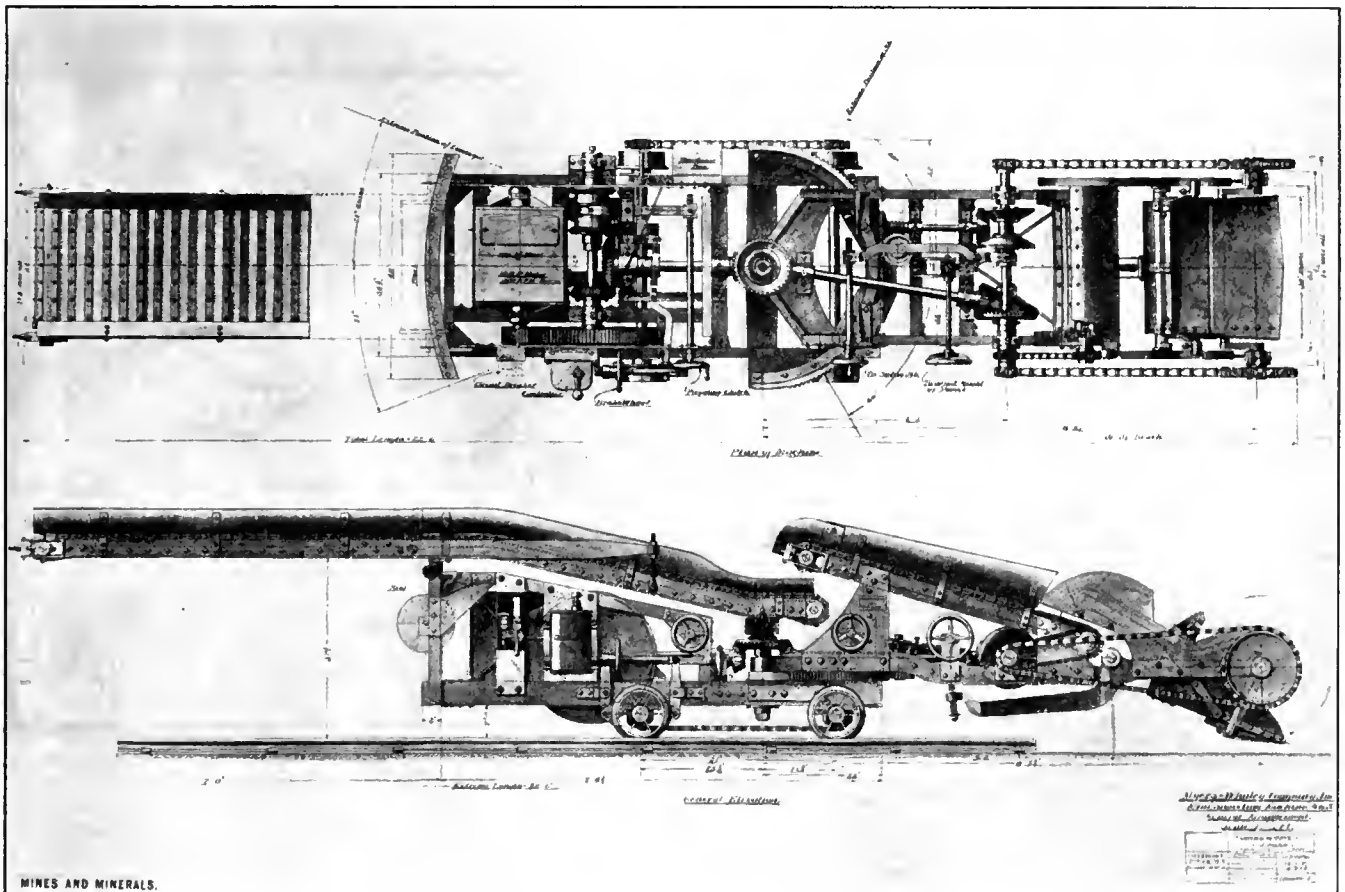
PLAN AND ELEVATION OF COAL-LOADING MACHINE
